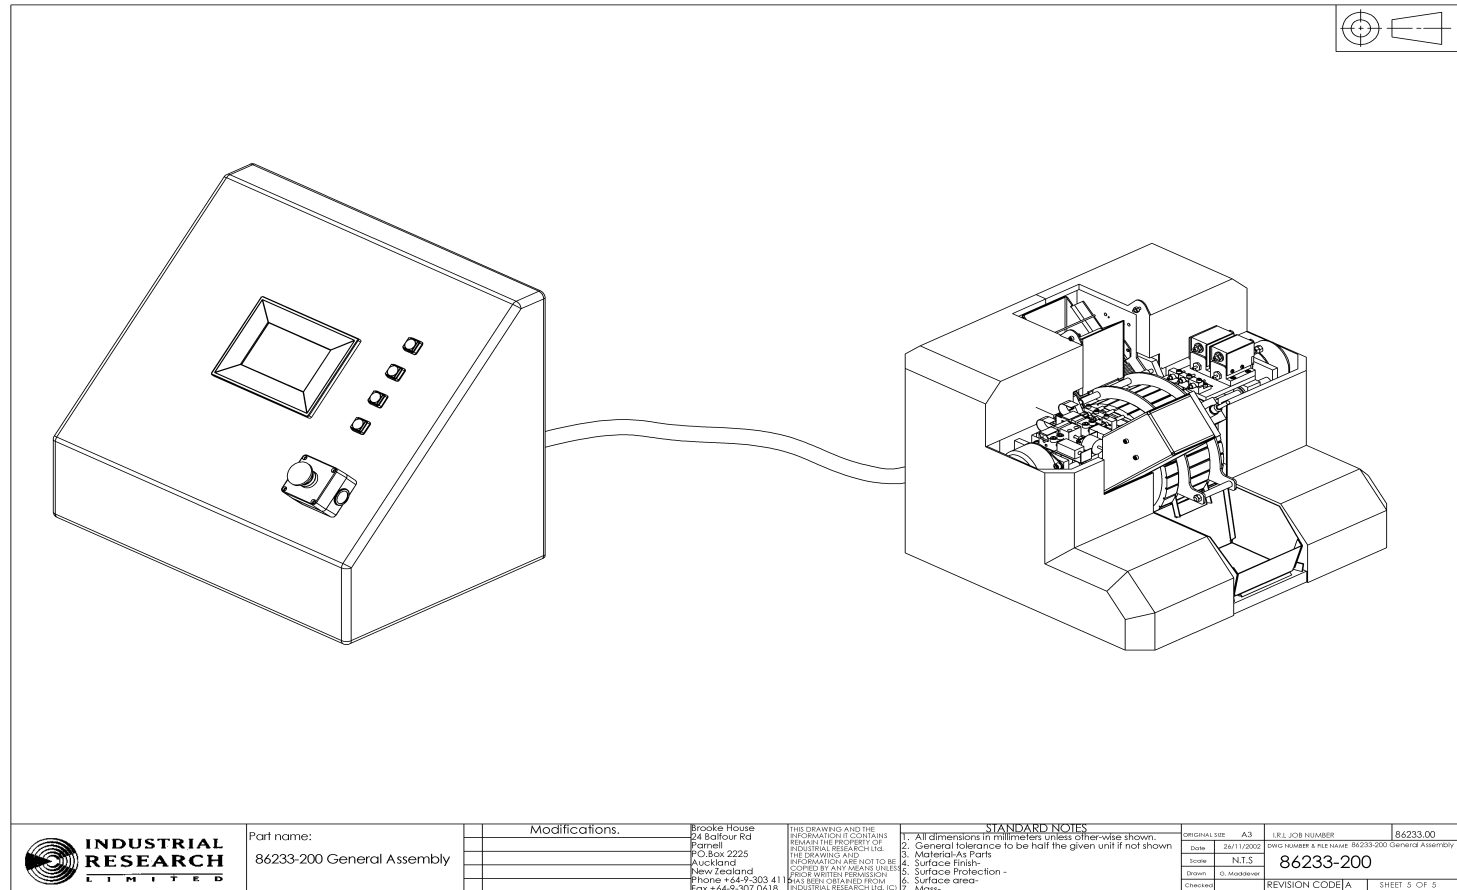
KNEX machine general assembly with user interface and control box. Covers on, vacuum and fluid lines disconnected.
